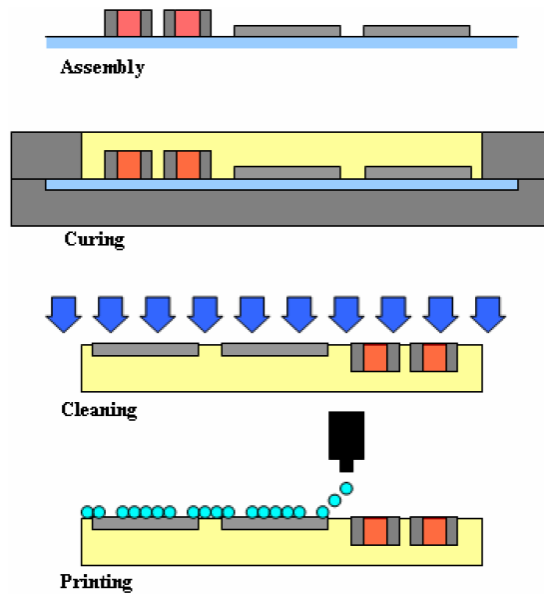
Process steps for ink-jet printed system in package manufacturing process (Figure taken from Matti Mäntysalo and Pauliina Mansikkamäki,[9].)
